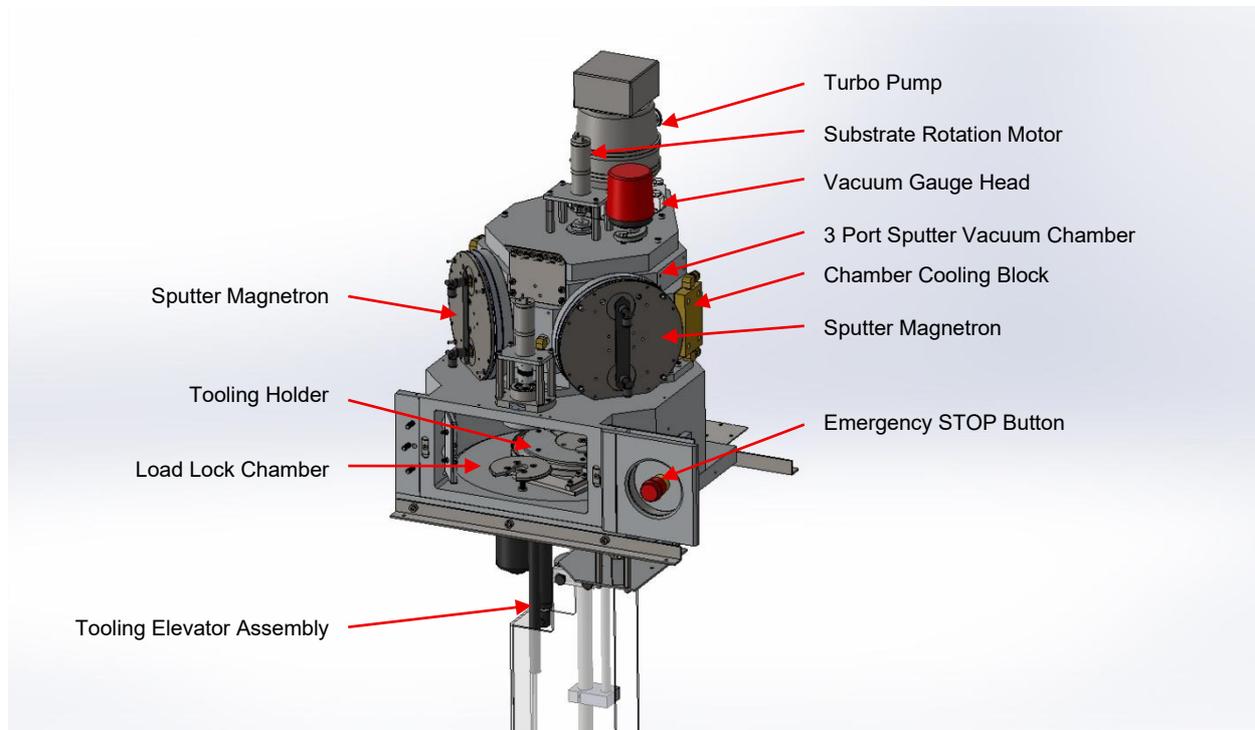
Chamber and Tooling Lift Assembly (3-port version shown)
